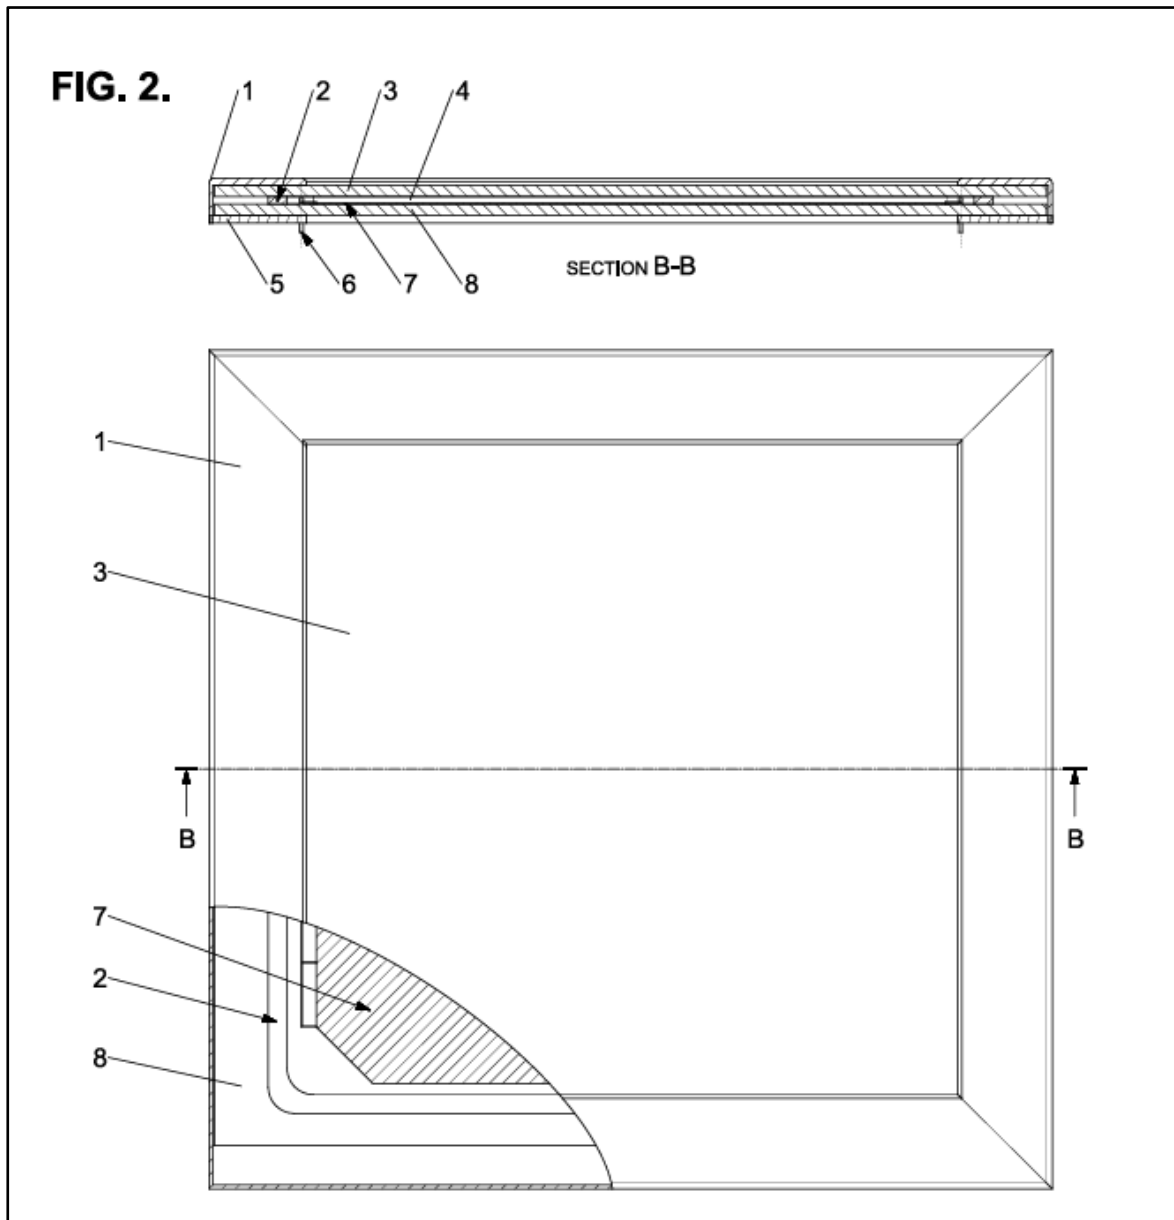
A top view of the crimp based single cell Prototype B containing section view B-B
